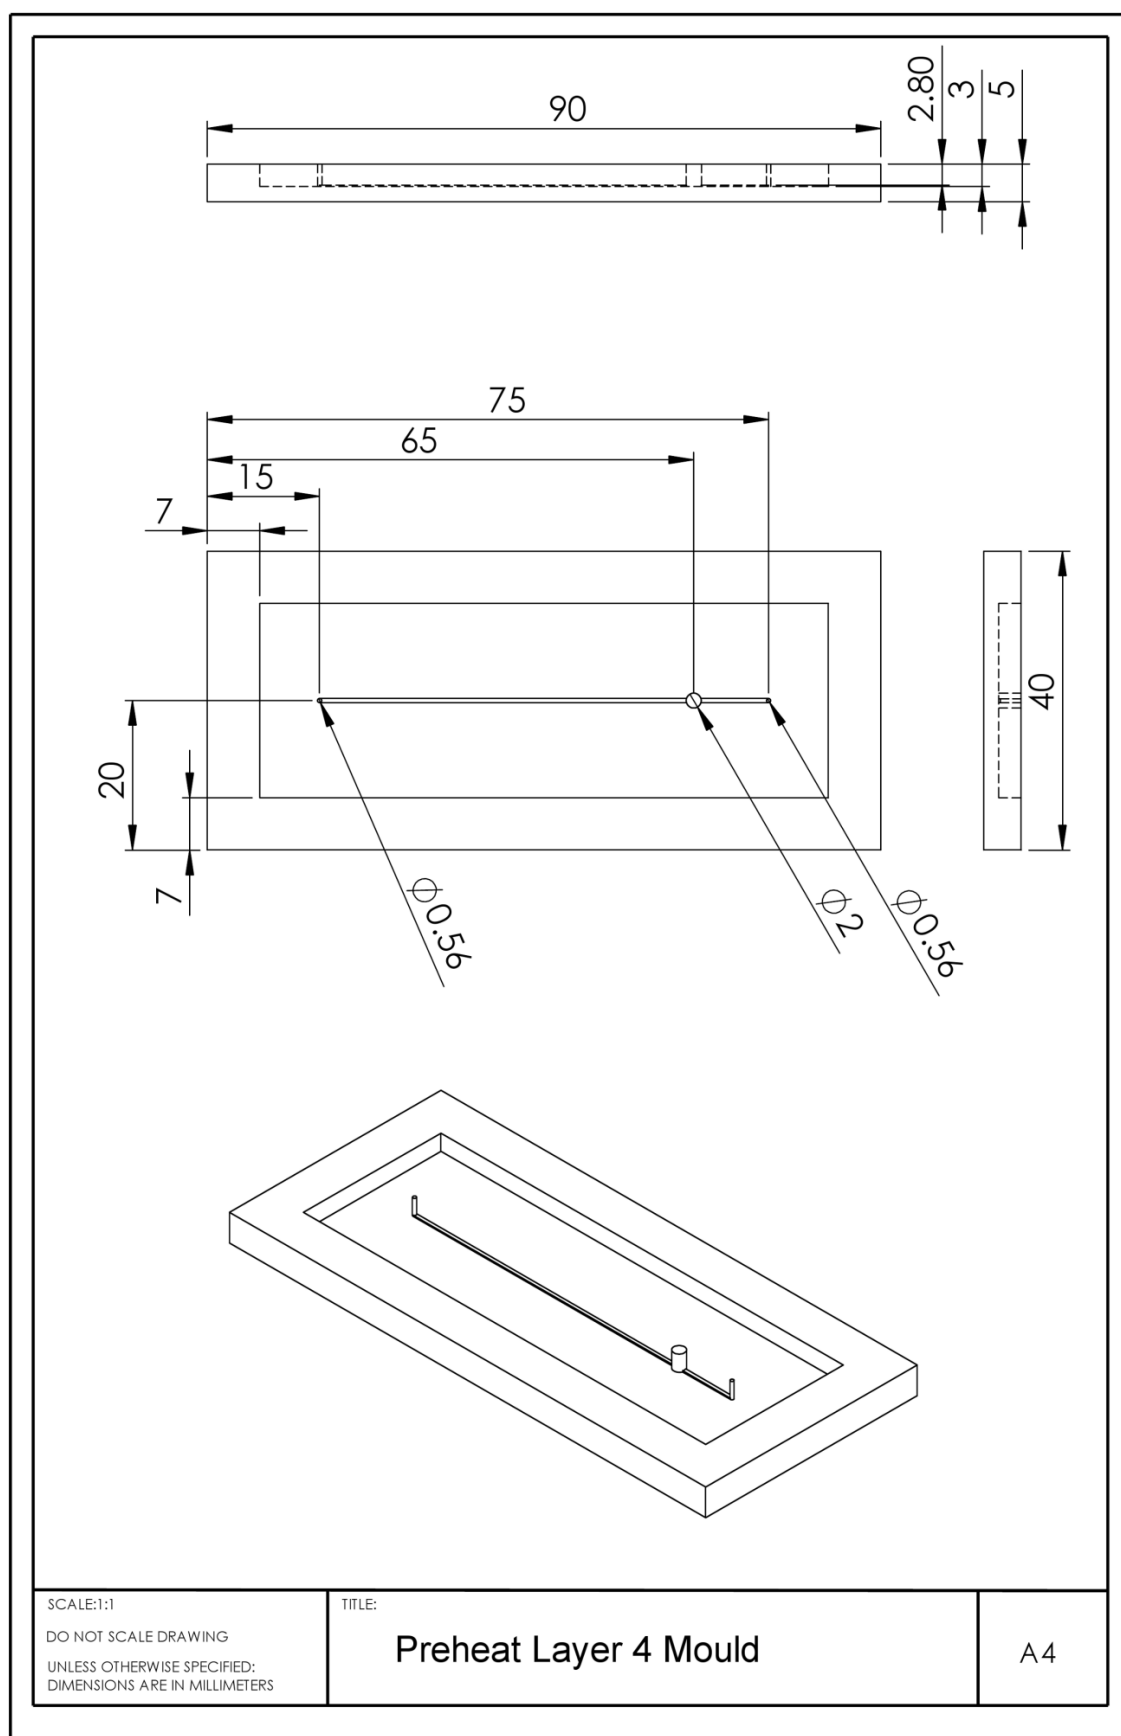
Technical drawing of mould for layer 4 of the preheat and bubble trap element (plasma bonded to layer 3, a 0.12 mm spin-coated layer of PDMS).
